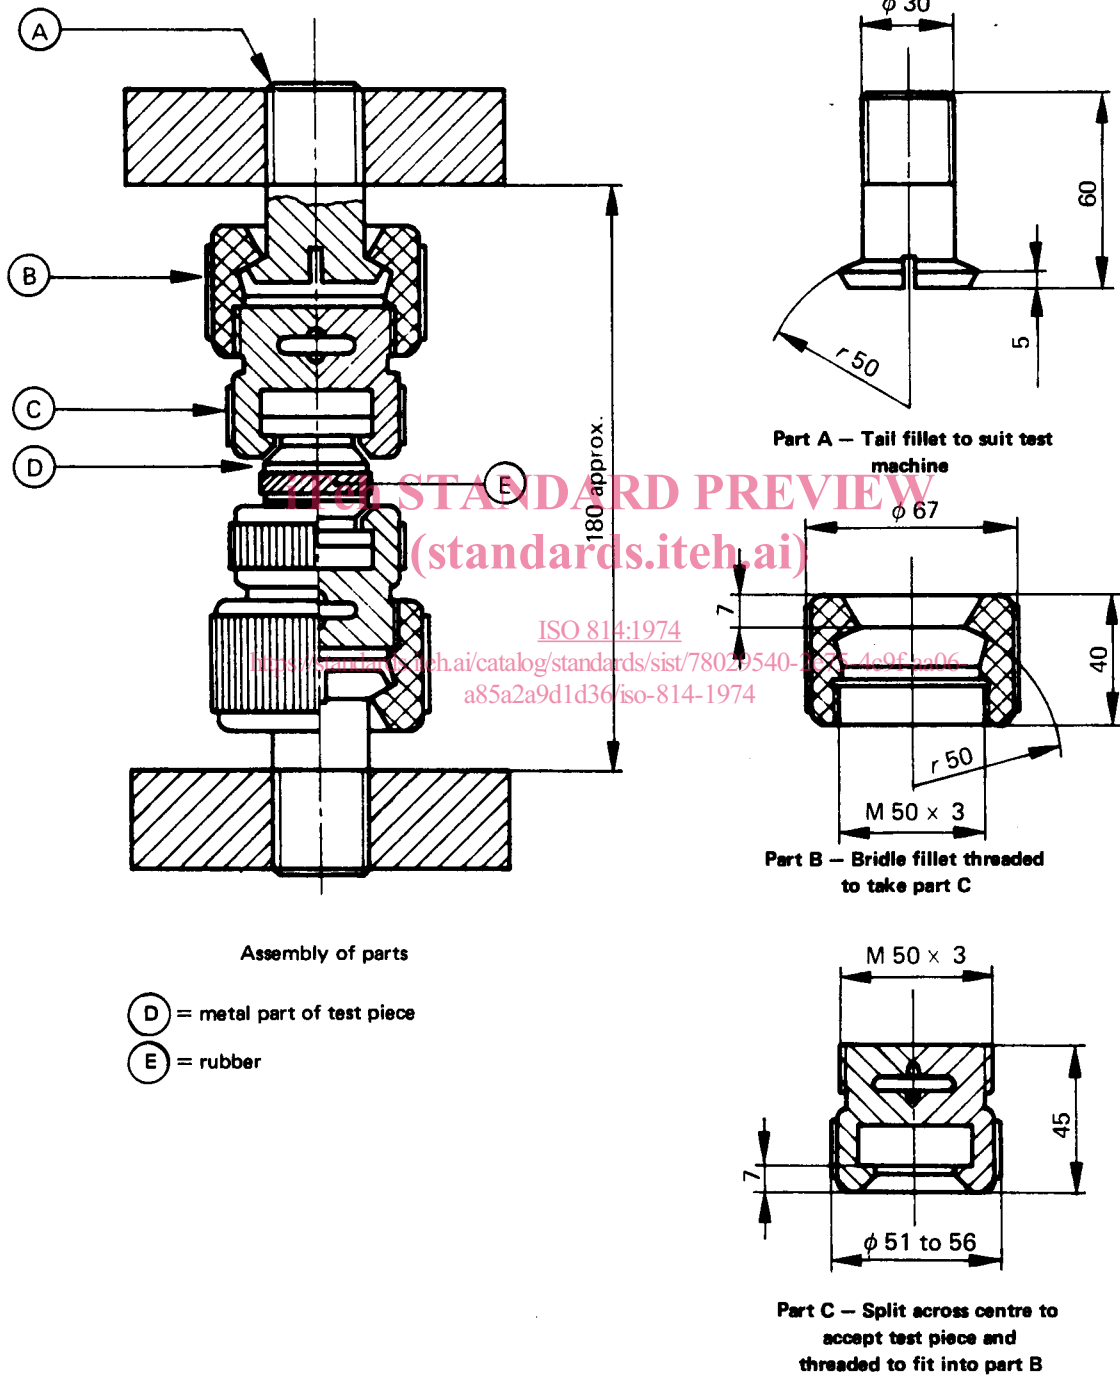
Test fixtures for holding rubber-to-metal bond test pieces
